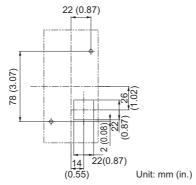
Panel Cut-out Dimensions (External/Face-mount Installation)
